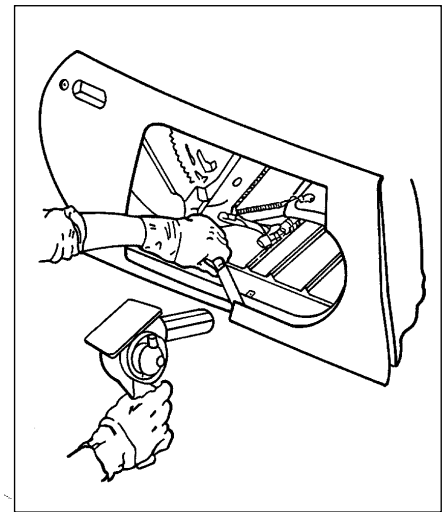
To break the adhesive bond when removing a part, heat the adhesive with a heat gun and remove it with a putty knife. (Courtesy of GM)
